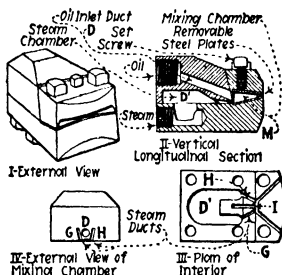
Details of tip of inside-mixing steam-atomizing oil burner.
